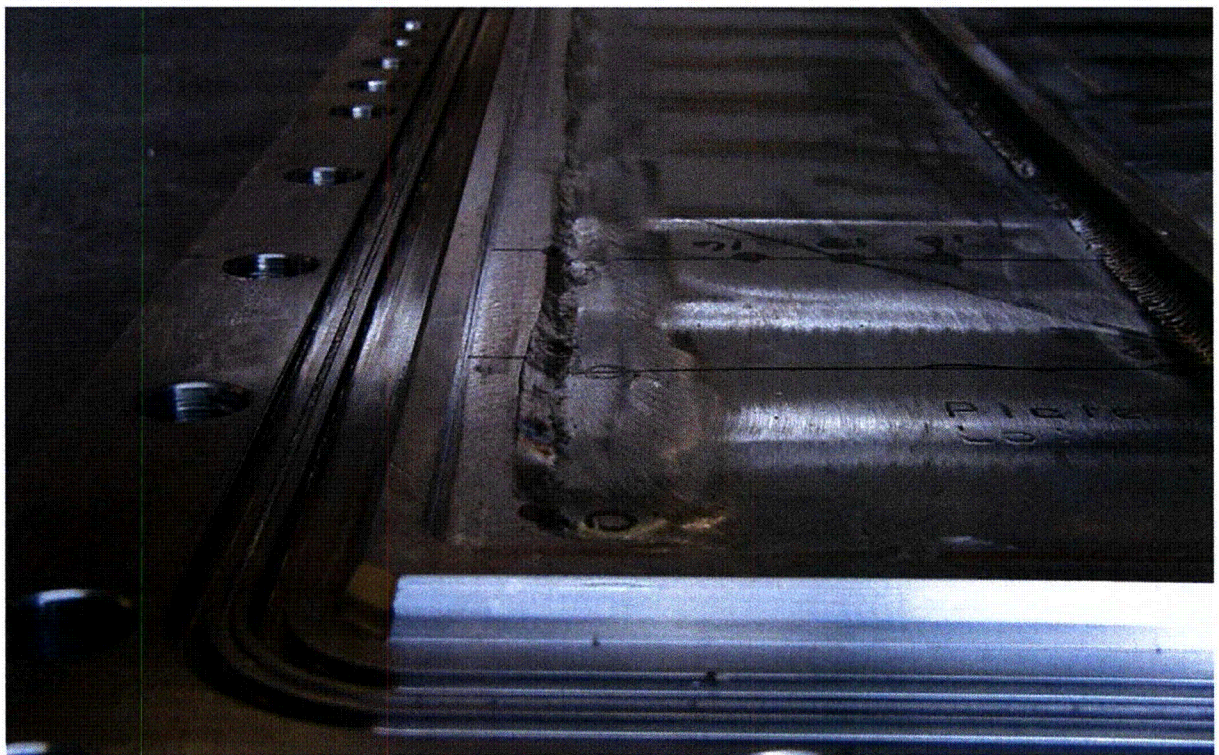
Post-Test Disassembly: Close-up View Closure Lid O-ring Seal Grooves
